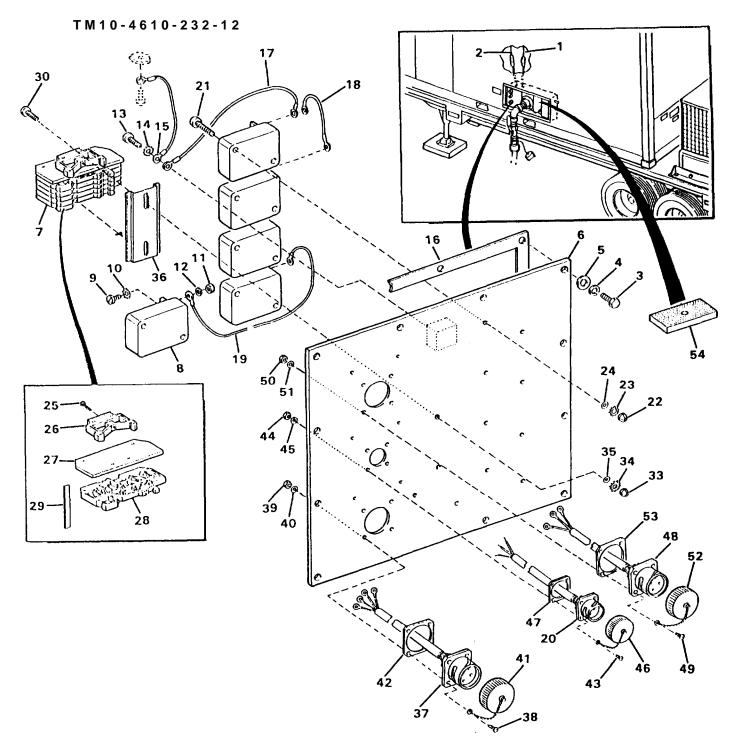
Distribution Pump External Electrical Panel Assembly (sheet 1 of 2)
